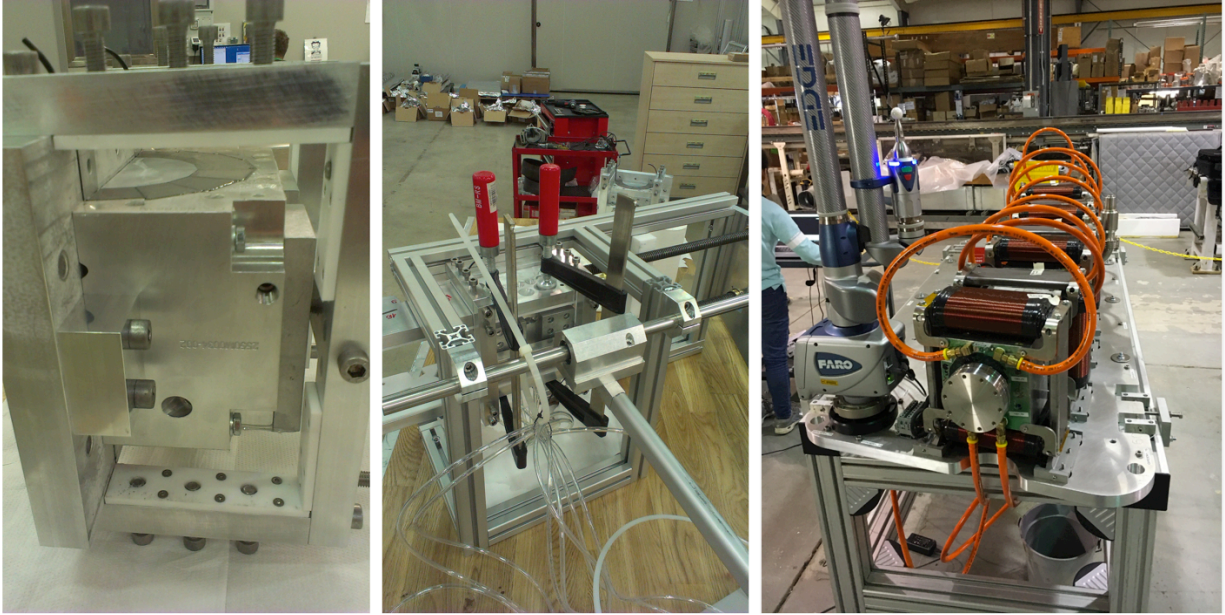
KYMA assembly line for the FFA magnets and the first prototype girder tested at the BNL.
